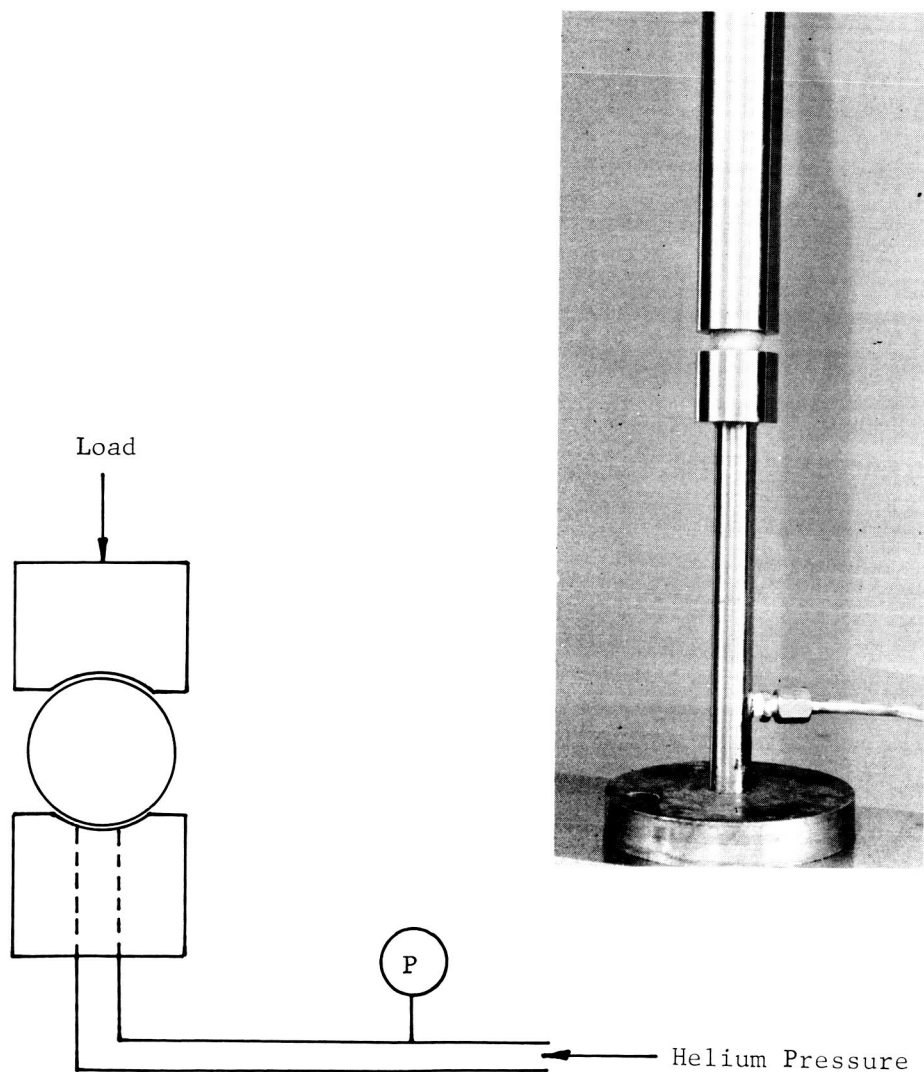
Leak Test Fixture Used for the Ball Valve Seals
